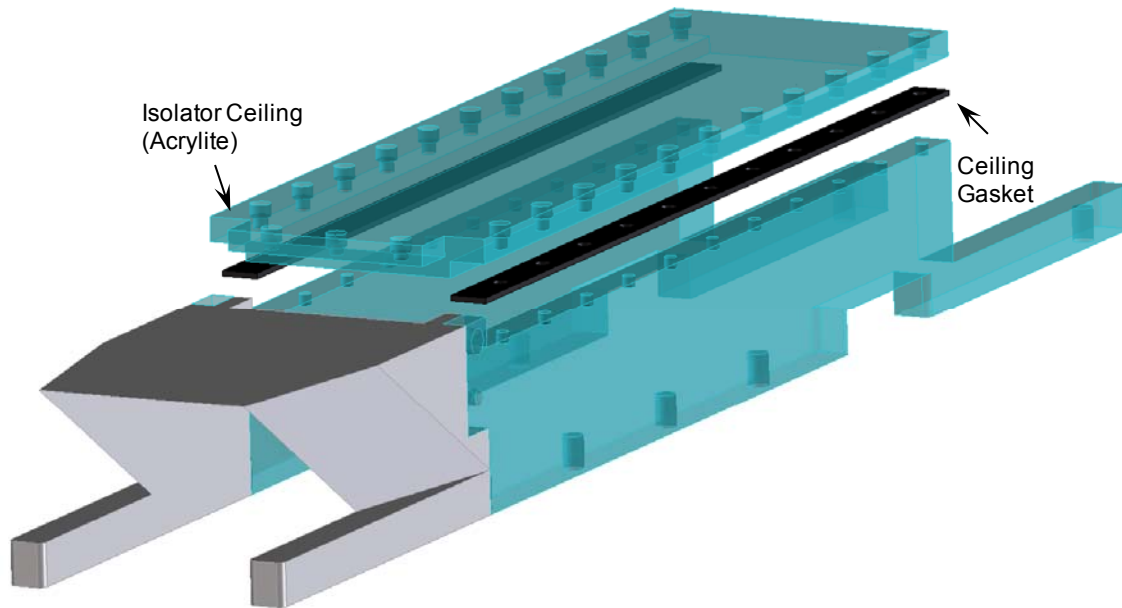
Exploded view of the 6-degree inlet / long-isolator model used for plan-view PIV measurements.
